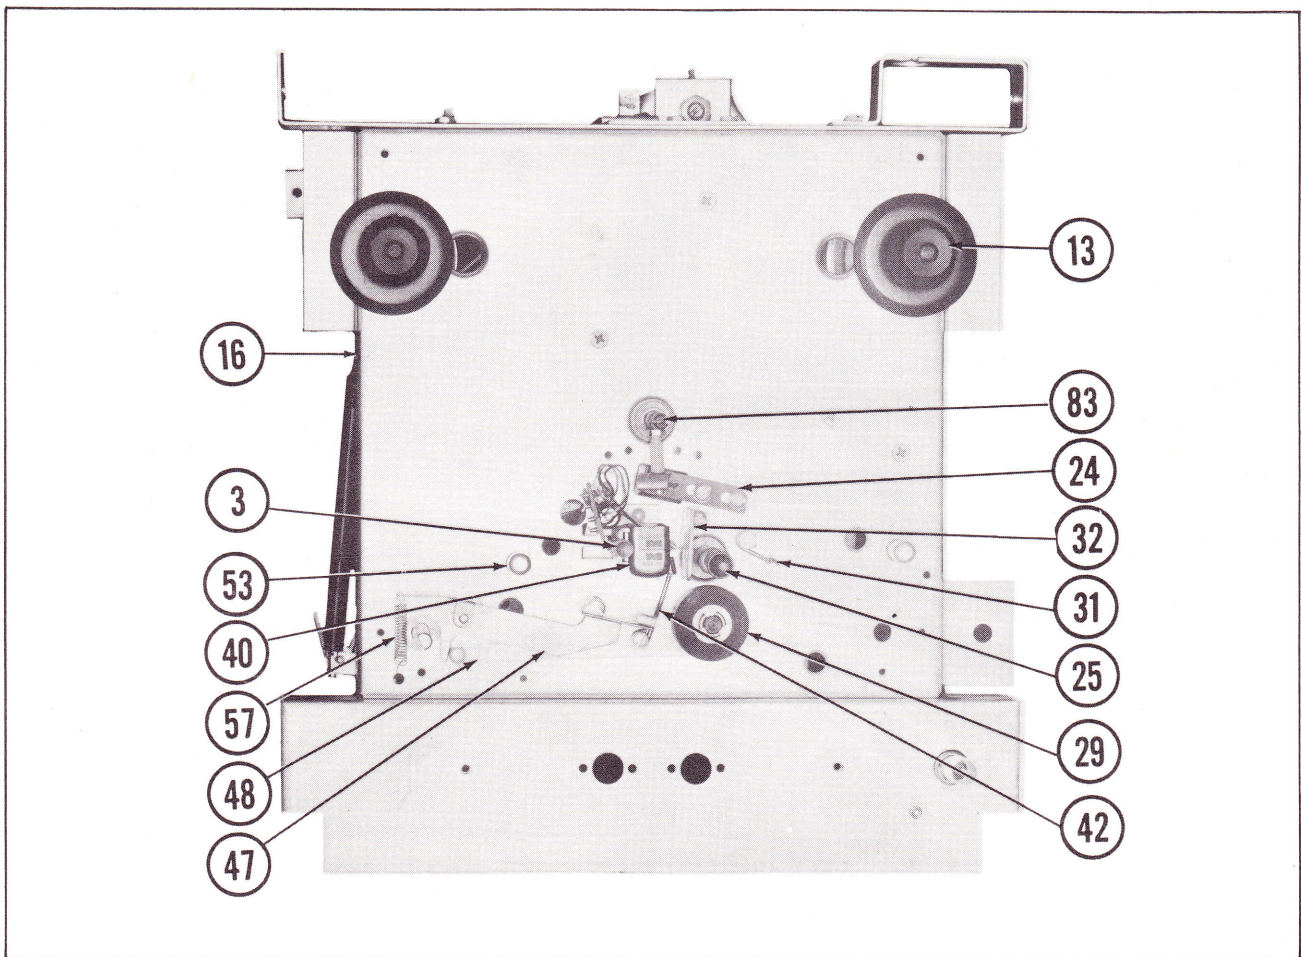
TOP VIEW OF MECHANISM WITH DRESS PLATE REMOVED
